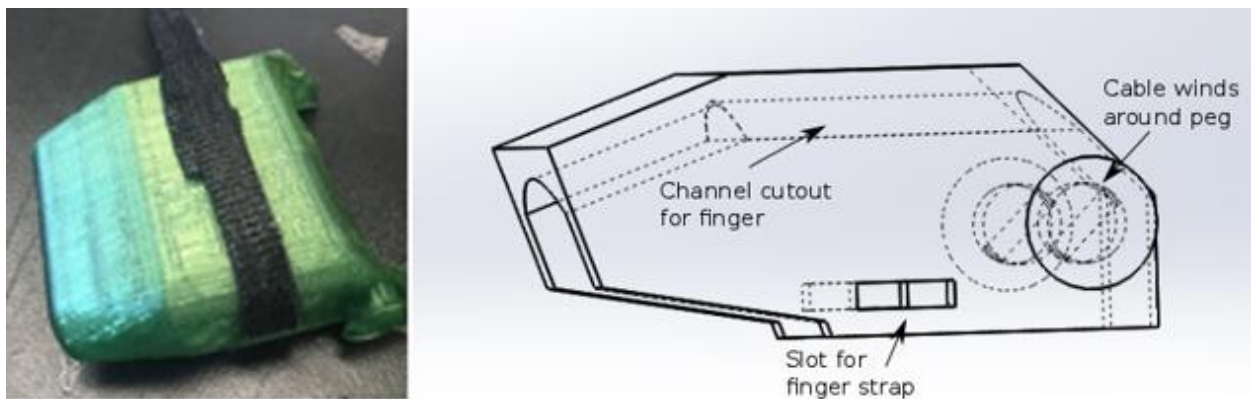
Finger Sleeve Design, Printed (Left) and CAD Model (Right)
